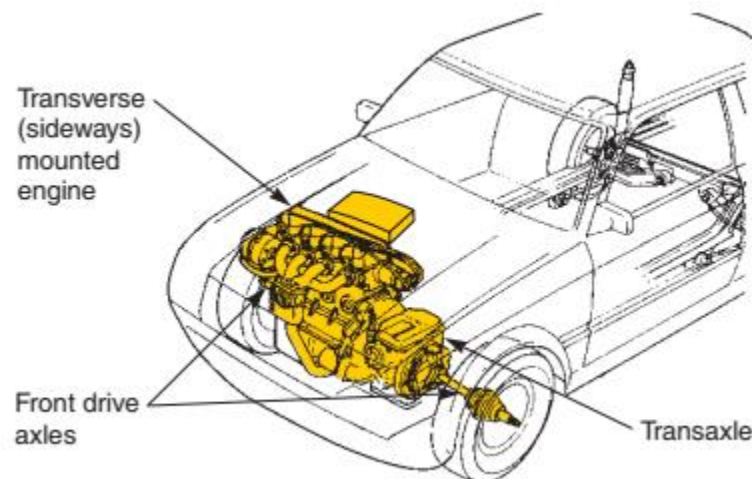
Front-wheel-drive vehicles do not have a drive shaft or a rear drive axle assembly. The complete drive train is in the front of the vehicle. (Ford)
